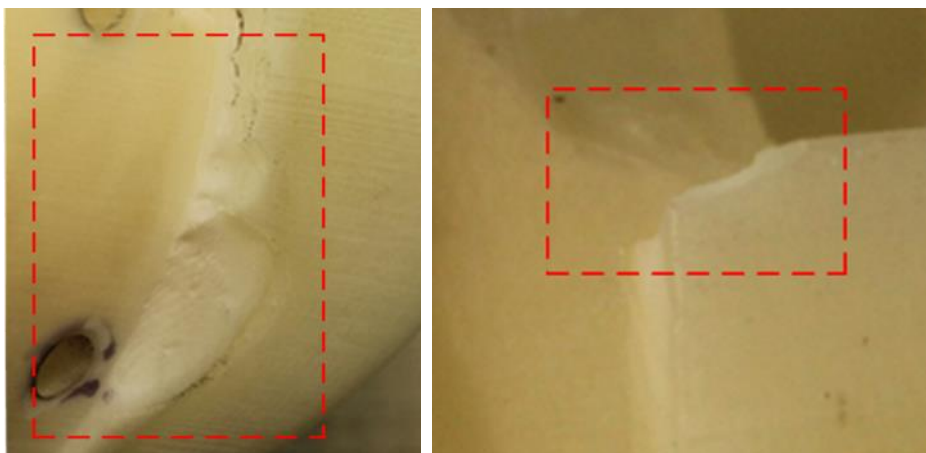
Chipped edge of the tool caused during the ejection of part. (b) Chipped corner of the tool due to injection pressure. See Figure 5 for location on the tool.
